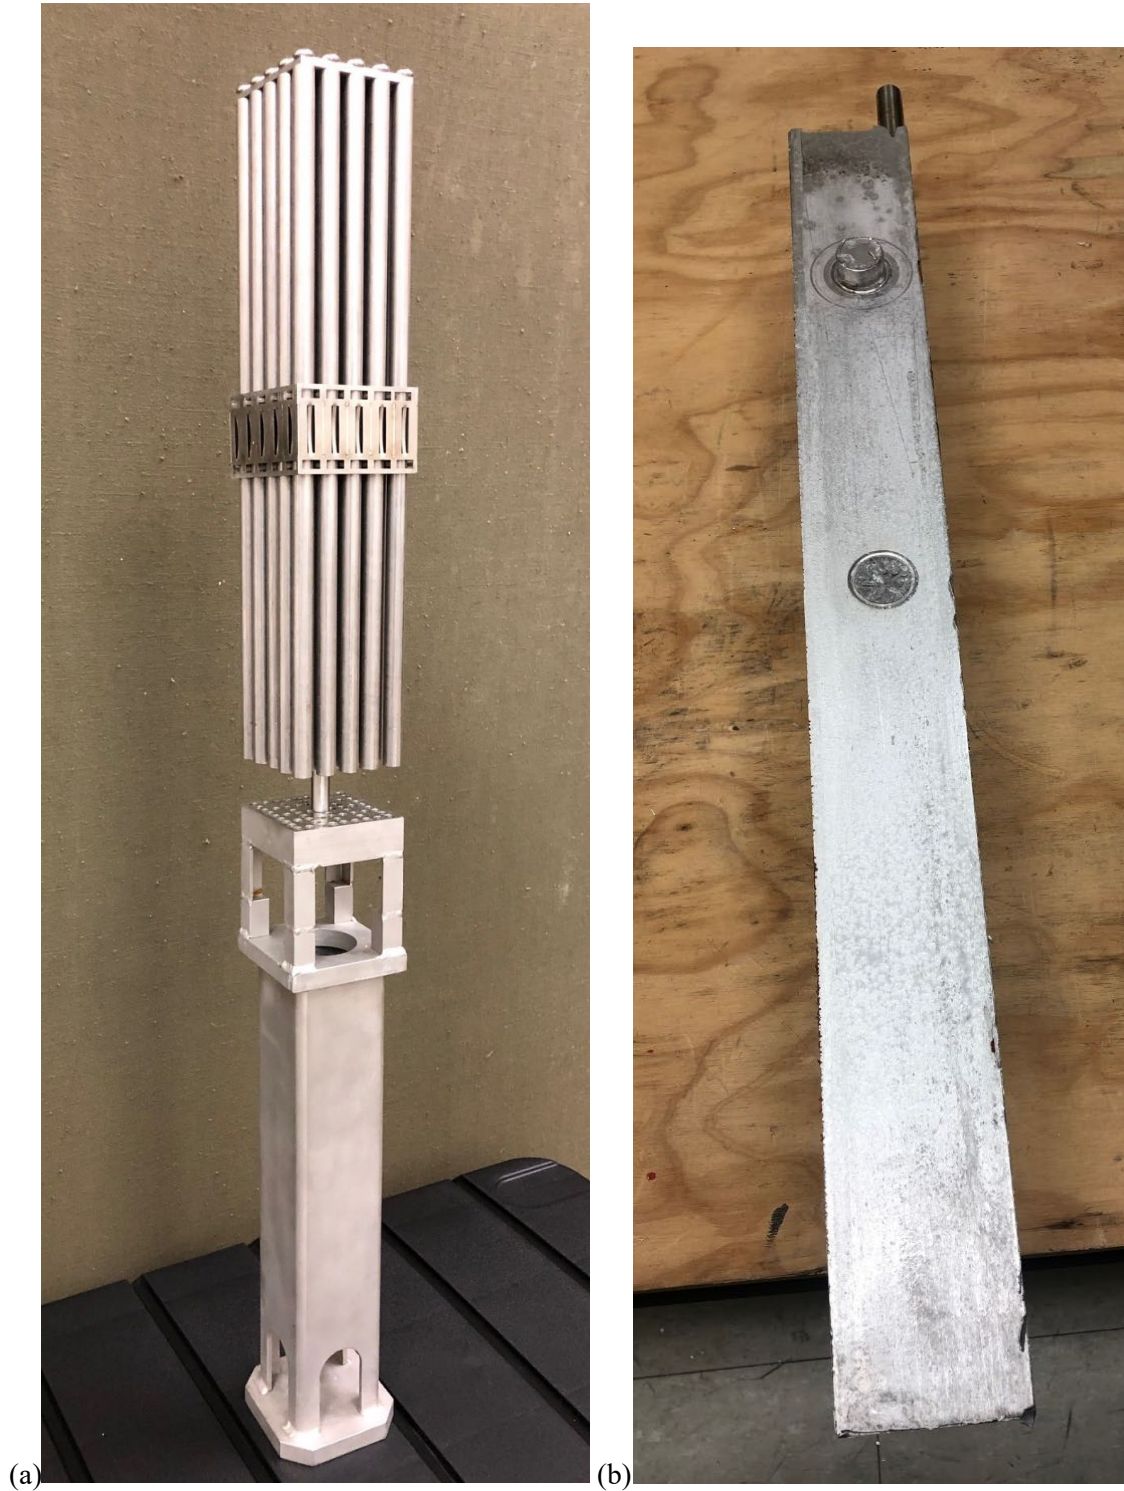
DPC mock-up experiments: (a) FY 22 internal mock-up test assembly without the filler tube, (b) Sn-Bi casting with the filler tube (Fortner et al., 2022).
